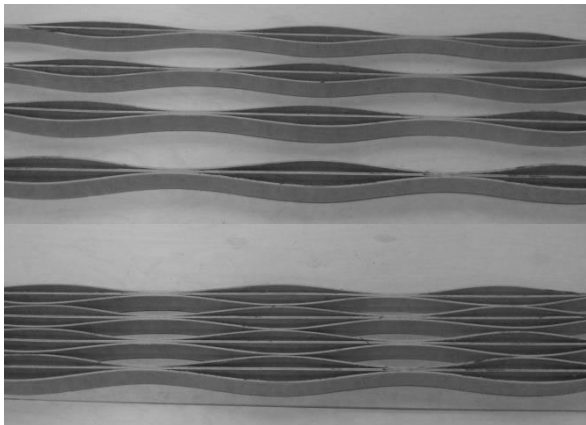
Assembly of composite plywood plate with cell-type core. Bottom only one face layer shown.
